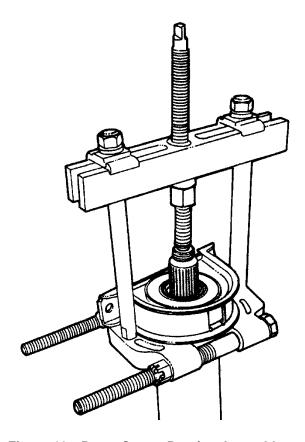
Press Center Bearing Assembly and Both Slingers Off Stub Shaft
